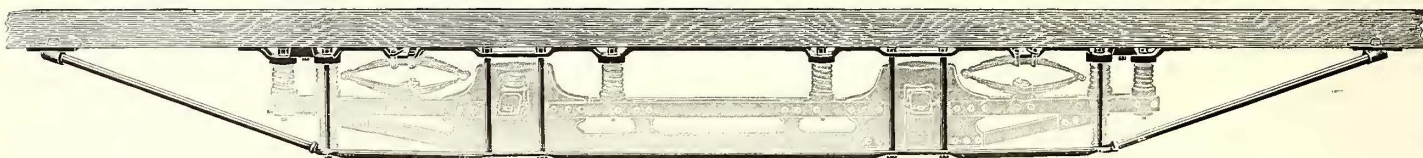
DIAGRAM SHOWING BRIDGE TRUSS IN PECKHAM TRUCK.
